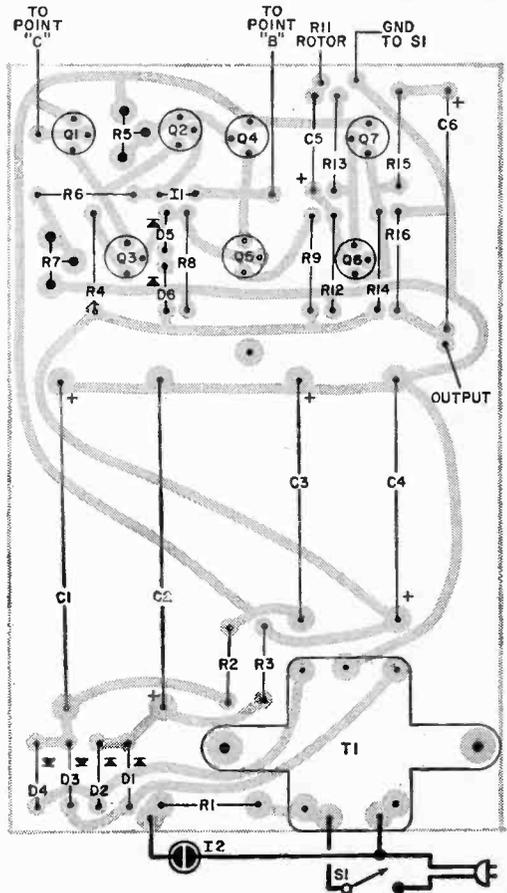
Printed circuit board speeds assembly. To make your own board, copy actual-size foil pattern.
